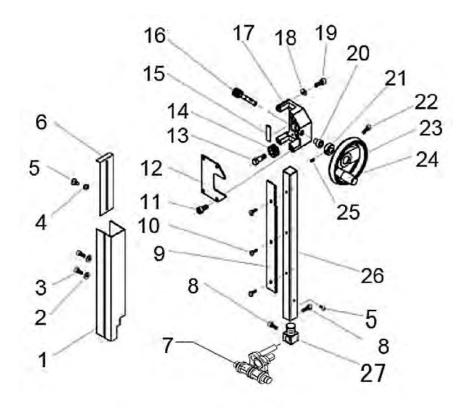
Spare parts drawing 3 - Wood Band Saw HBS 400
